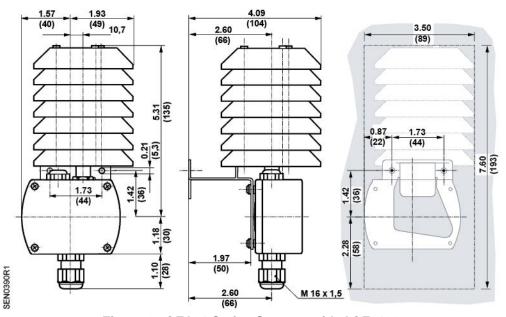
QFA31 Series Sensors with AQF3100 Dimensions in Inches (Millimeters).
